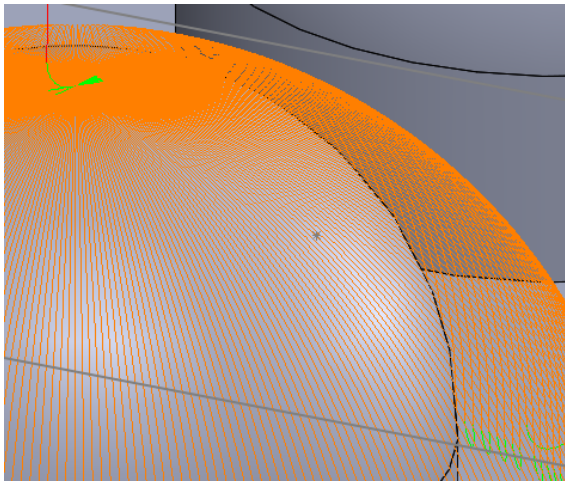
Toolpaths for 3-axis milling with employed radial strategy
